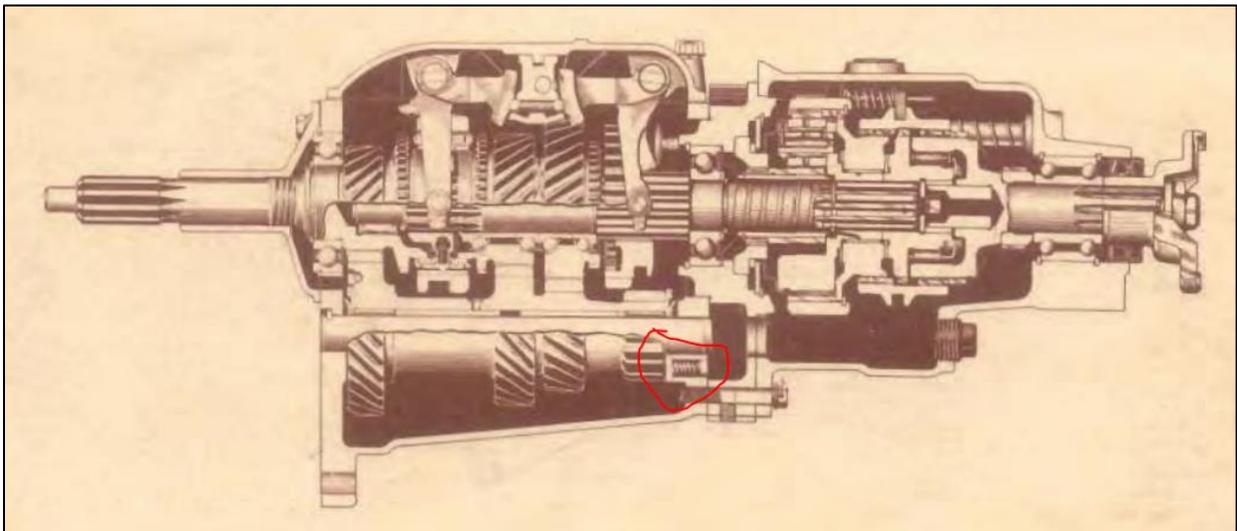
1941 - mid 1948 Trans & OD with thrust springs
